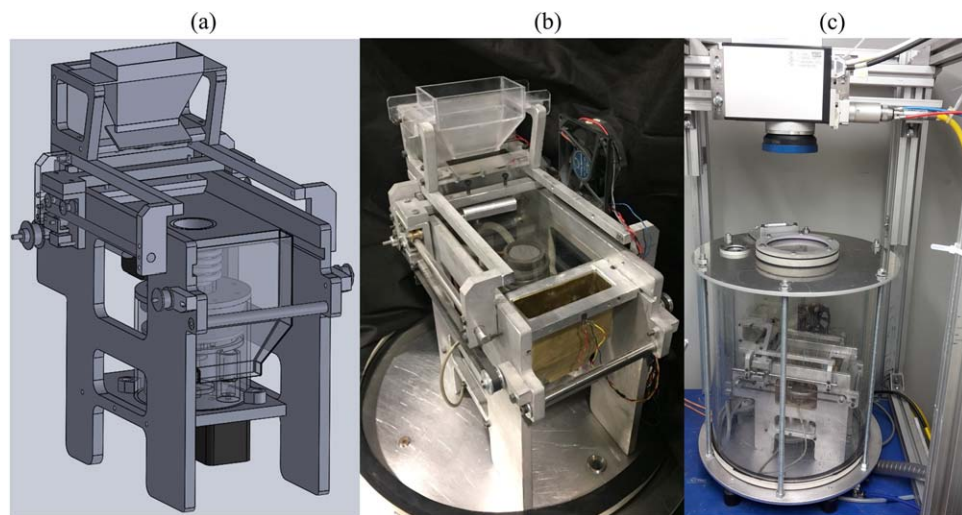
Project *Grisù* (a) CAD design (b) assembled prototype system (c) final set-up.
